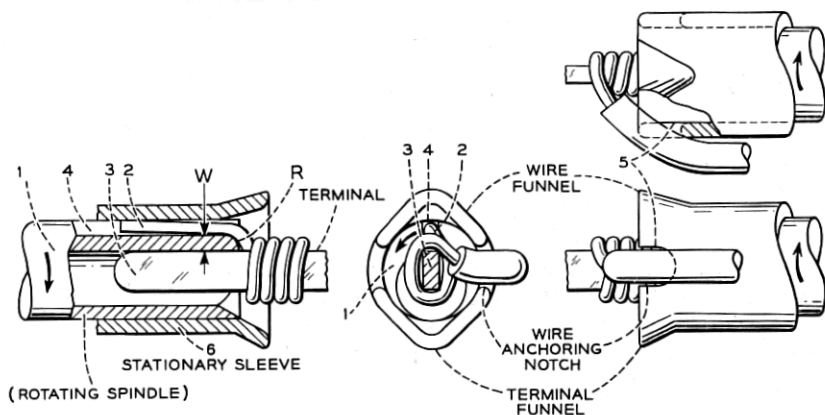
Method of wrapping the skinner wire on a rectangular terminal.
